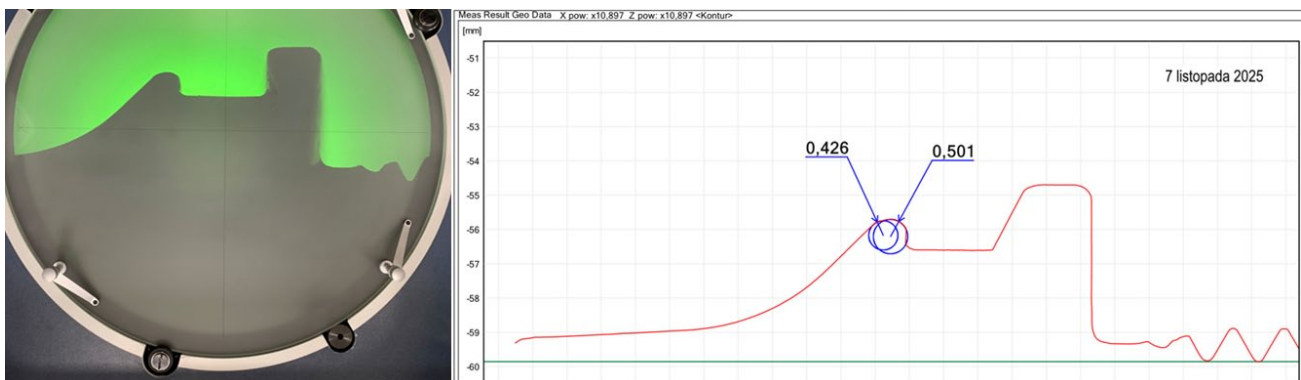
Shape of the final preform head after the additional thread rolling modification – from left: projection image; radius measurement using a profilometer
